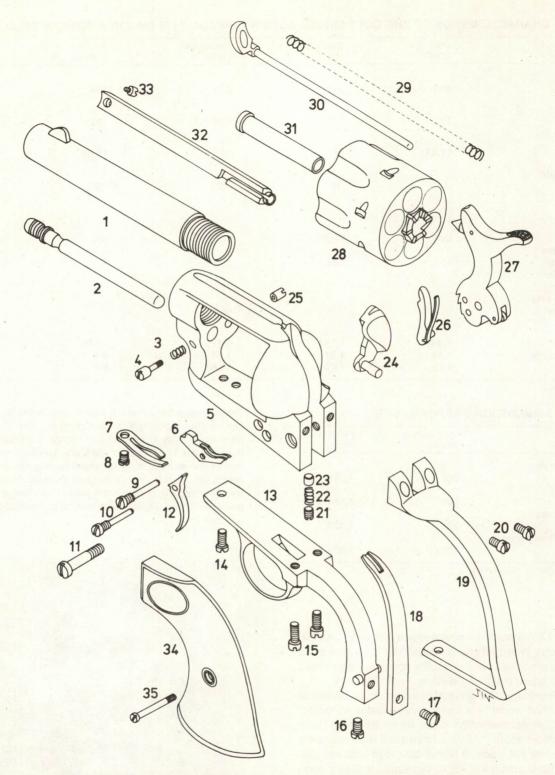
Exploded view of the Colt Single-Action Army. (Jimbo)
